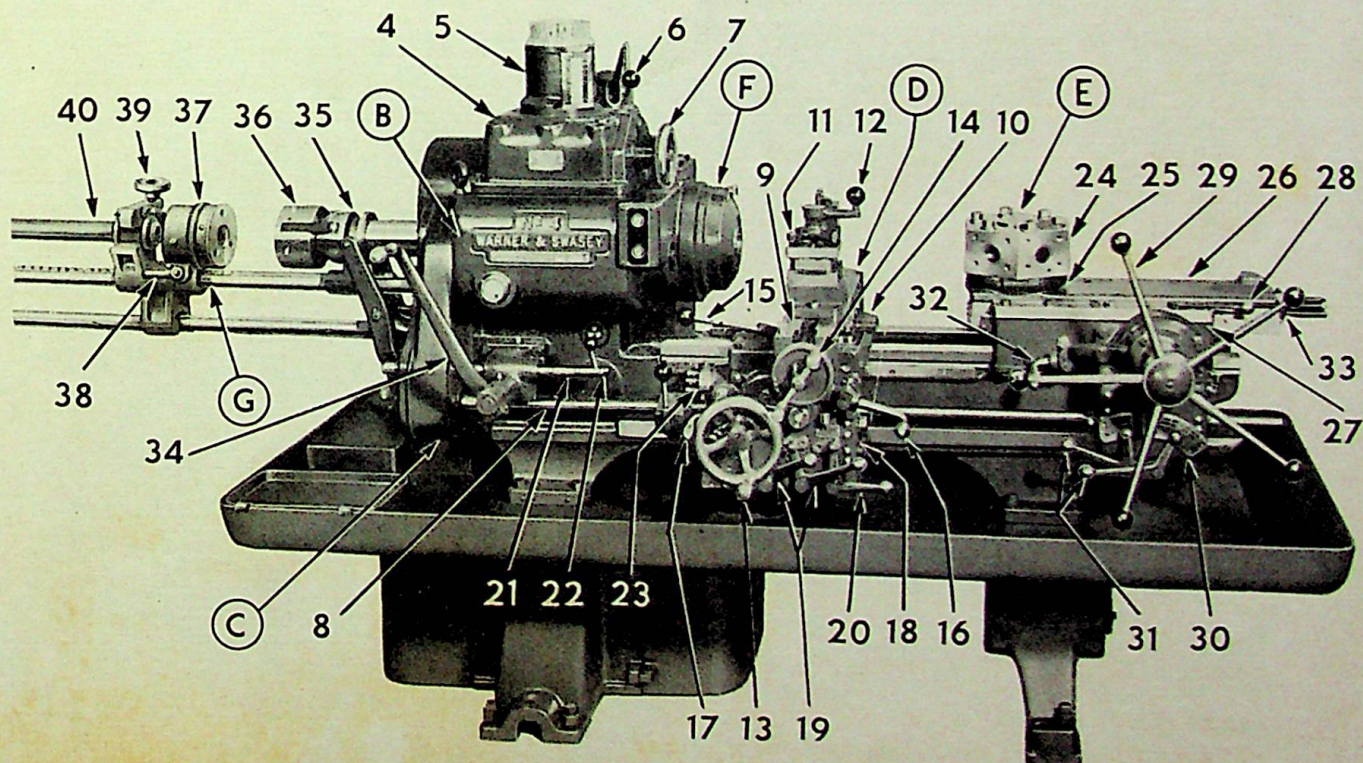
Nomenclature—No. 4 Universal Turret Lathe
